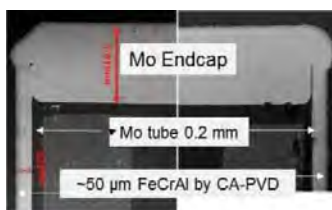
Uniform FeCrAl coating thickness of 50  $\mu\text{m}$  on a welded Mo tube (similar results for Zircaloy coating)
